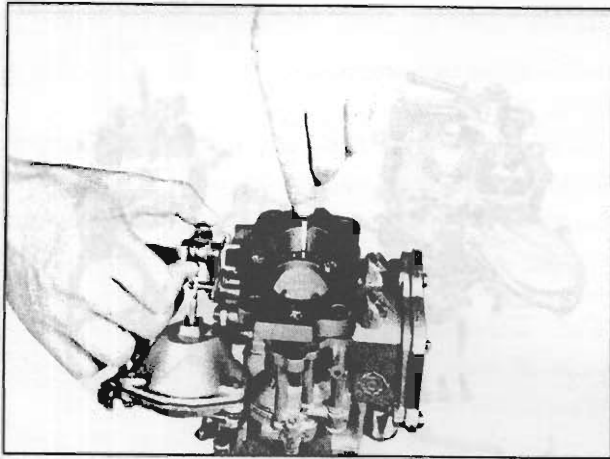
Measurement of clearance of starting interlock valve opening
